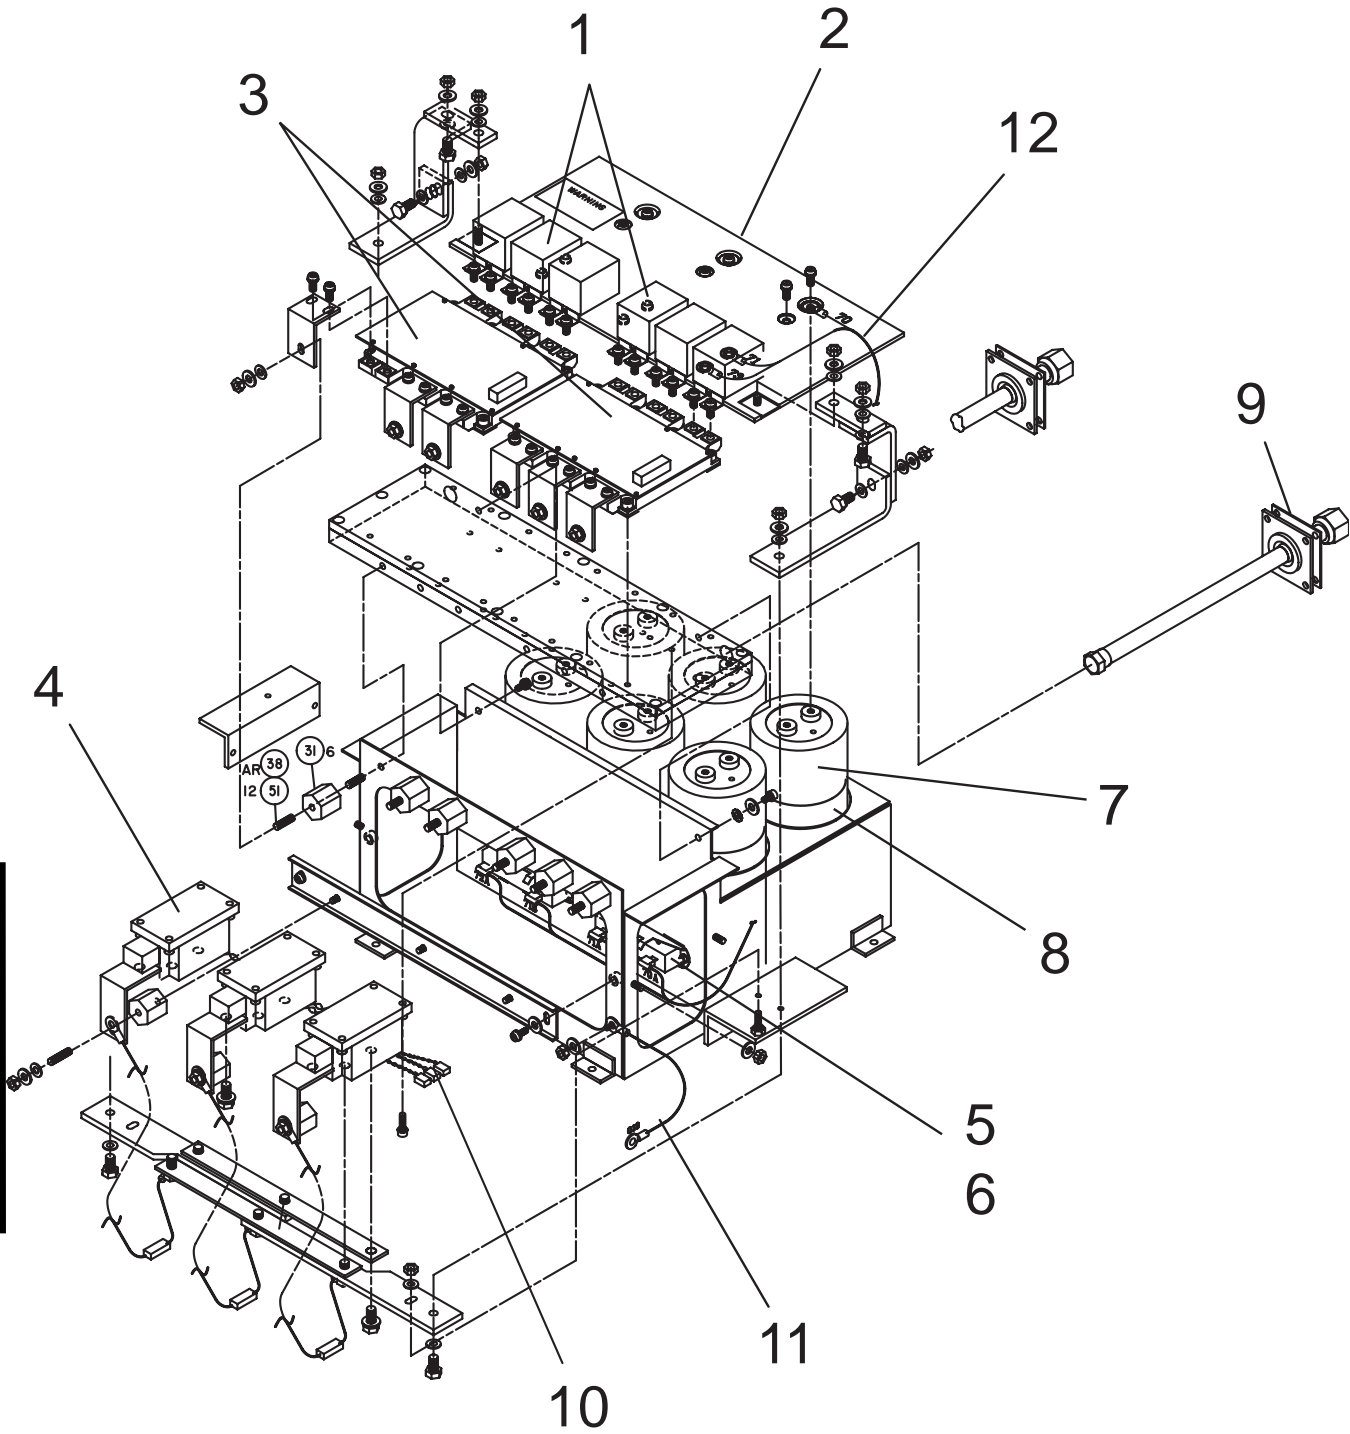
A – VARIABLE SPEED DRIVE POWER ASSEMBLY COMPONENTS - 3 COMPRESSOR UNITS (REF. TABLE 9A, PAGE 49)
